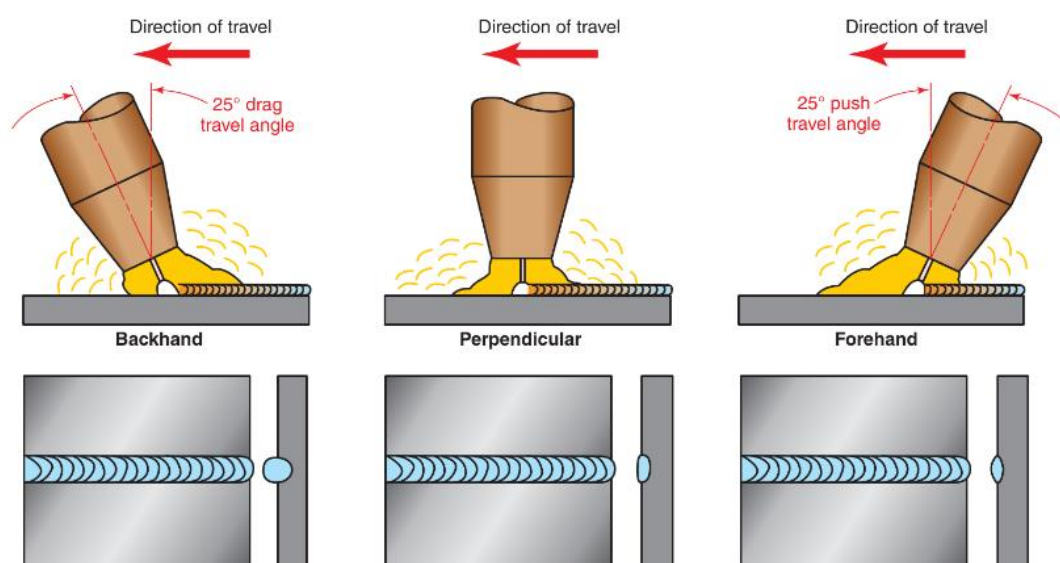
Backhand (A), perpendicular (B) and forehand (C) welding techniques.
